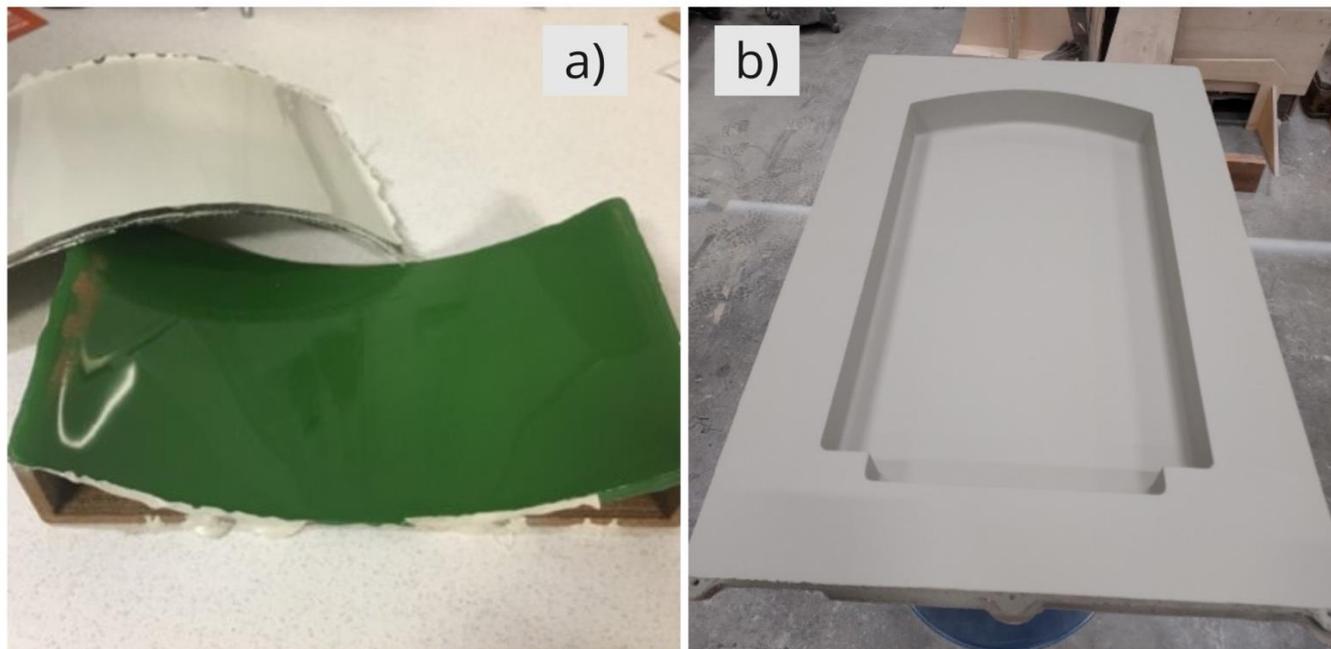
Proof of concept WPC mould produced by fused granular fabrication method: a) green surface 3D-printed mould and fibre reinforced plastic product released from the WPC mould; b) the WPC based mould for making boat parts printed at Centria UAS
